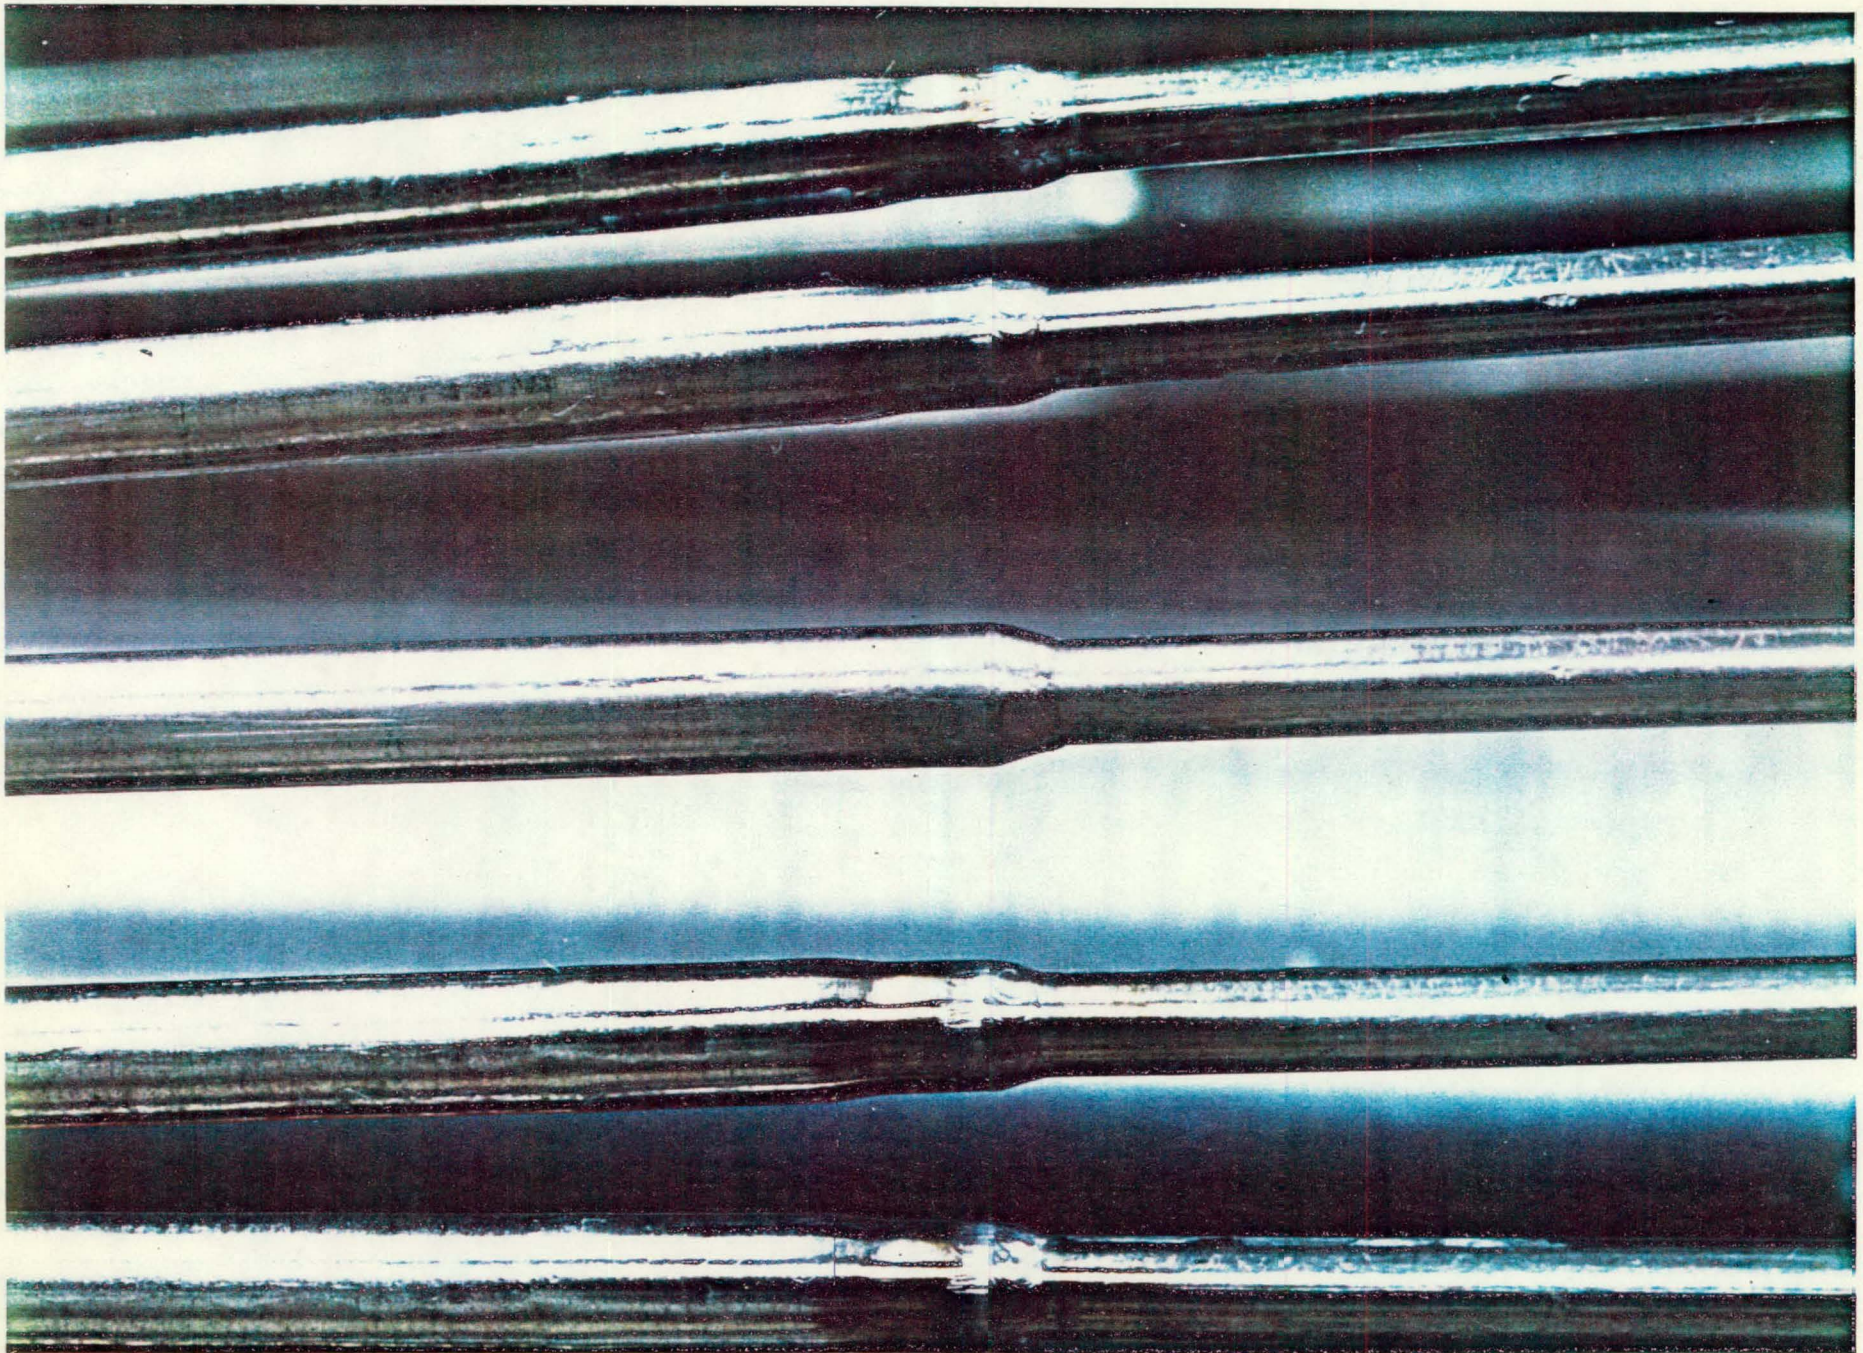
THERMOCOUPLE PRESSURE BOUNDARY WELDS
